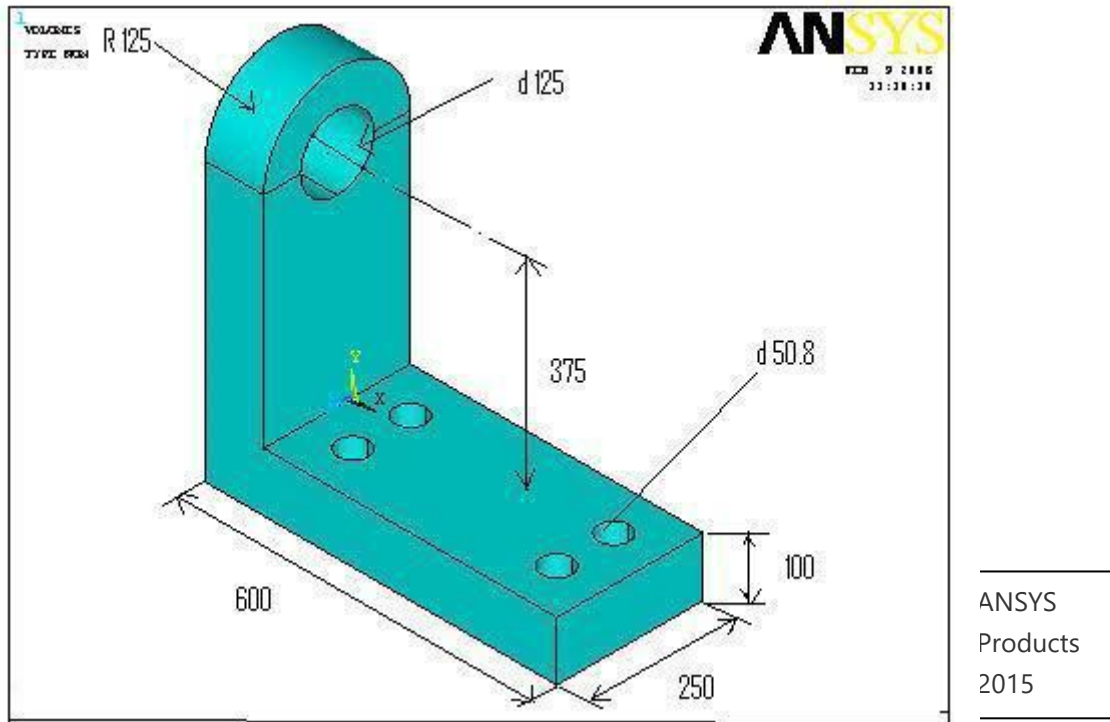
A 3D Model of the angle plate (all dimensions are in mm)
